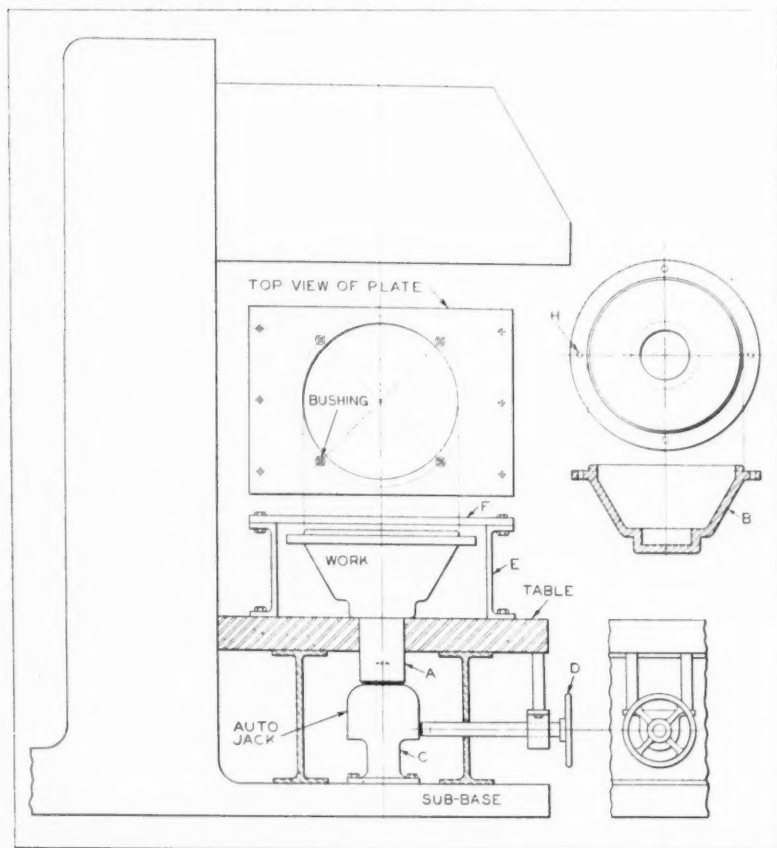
Diagram Showing Arrangement of Drill Press with Built-in Universal Jig, in which Automobile Jack is Used for Clamping Work
